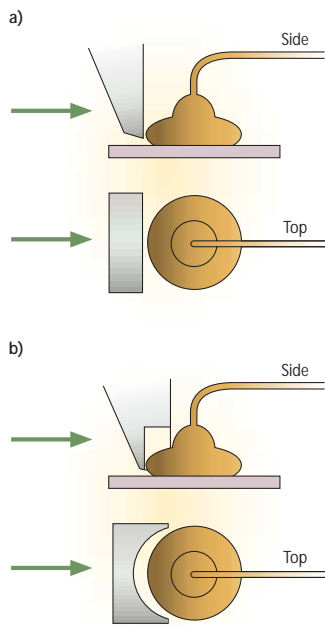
Diagrams showing the side and top views of ball bond shear testing using (a) a standard tool and (b) a cavity tool.
